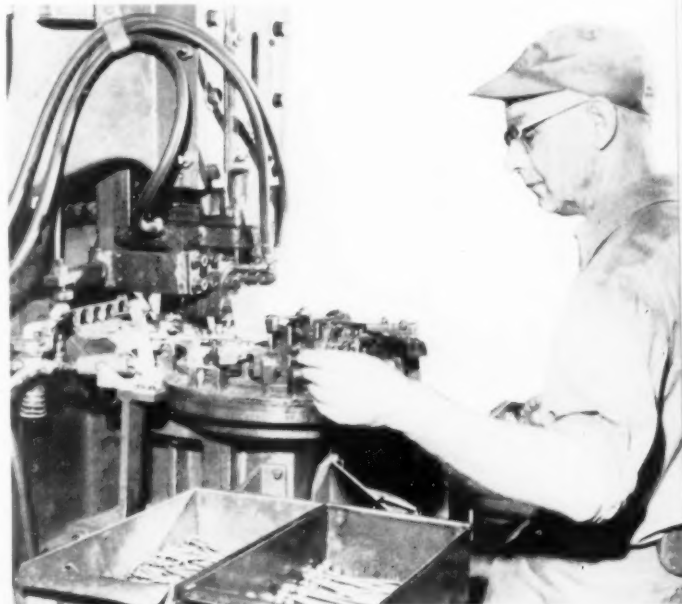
Automatic dial index feed and simple fixtures in projection-welding setup at Buick Div. of GM provide high rate of assembly of rod and cup details for valve operating mechanism. Only loading and unloading are manual.
